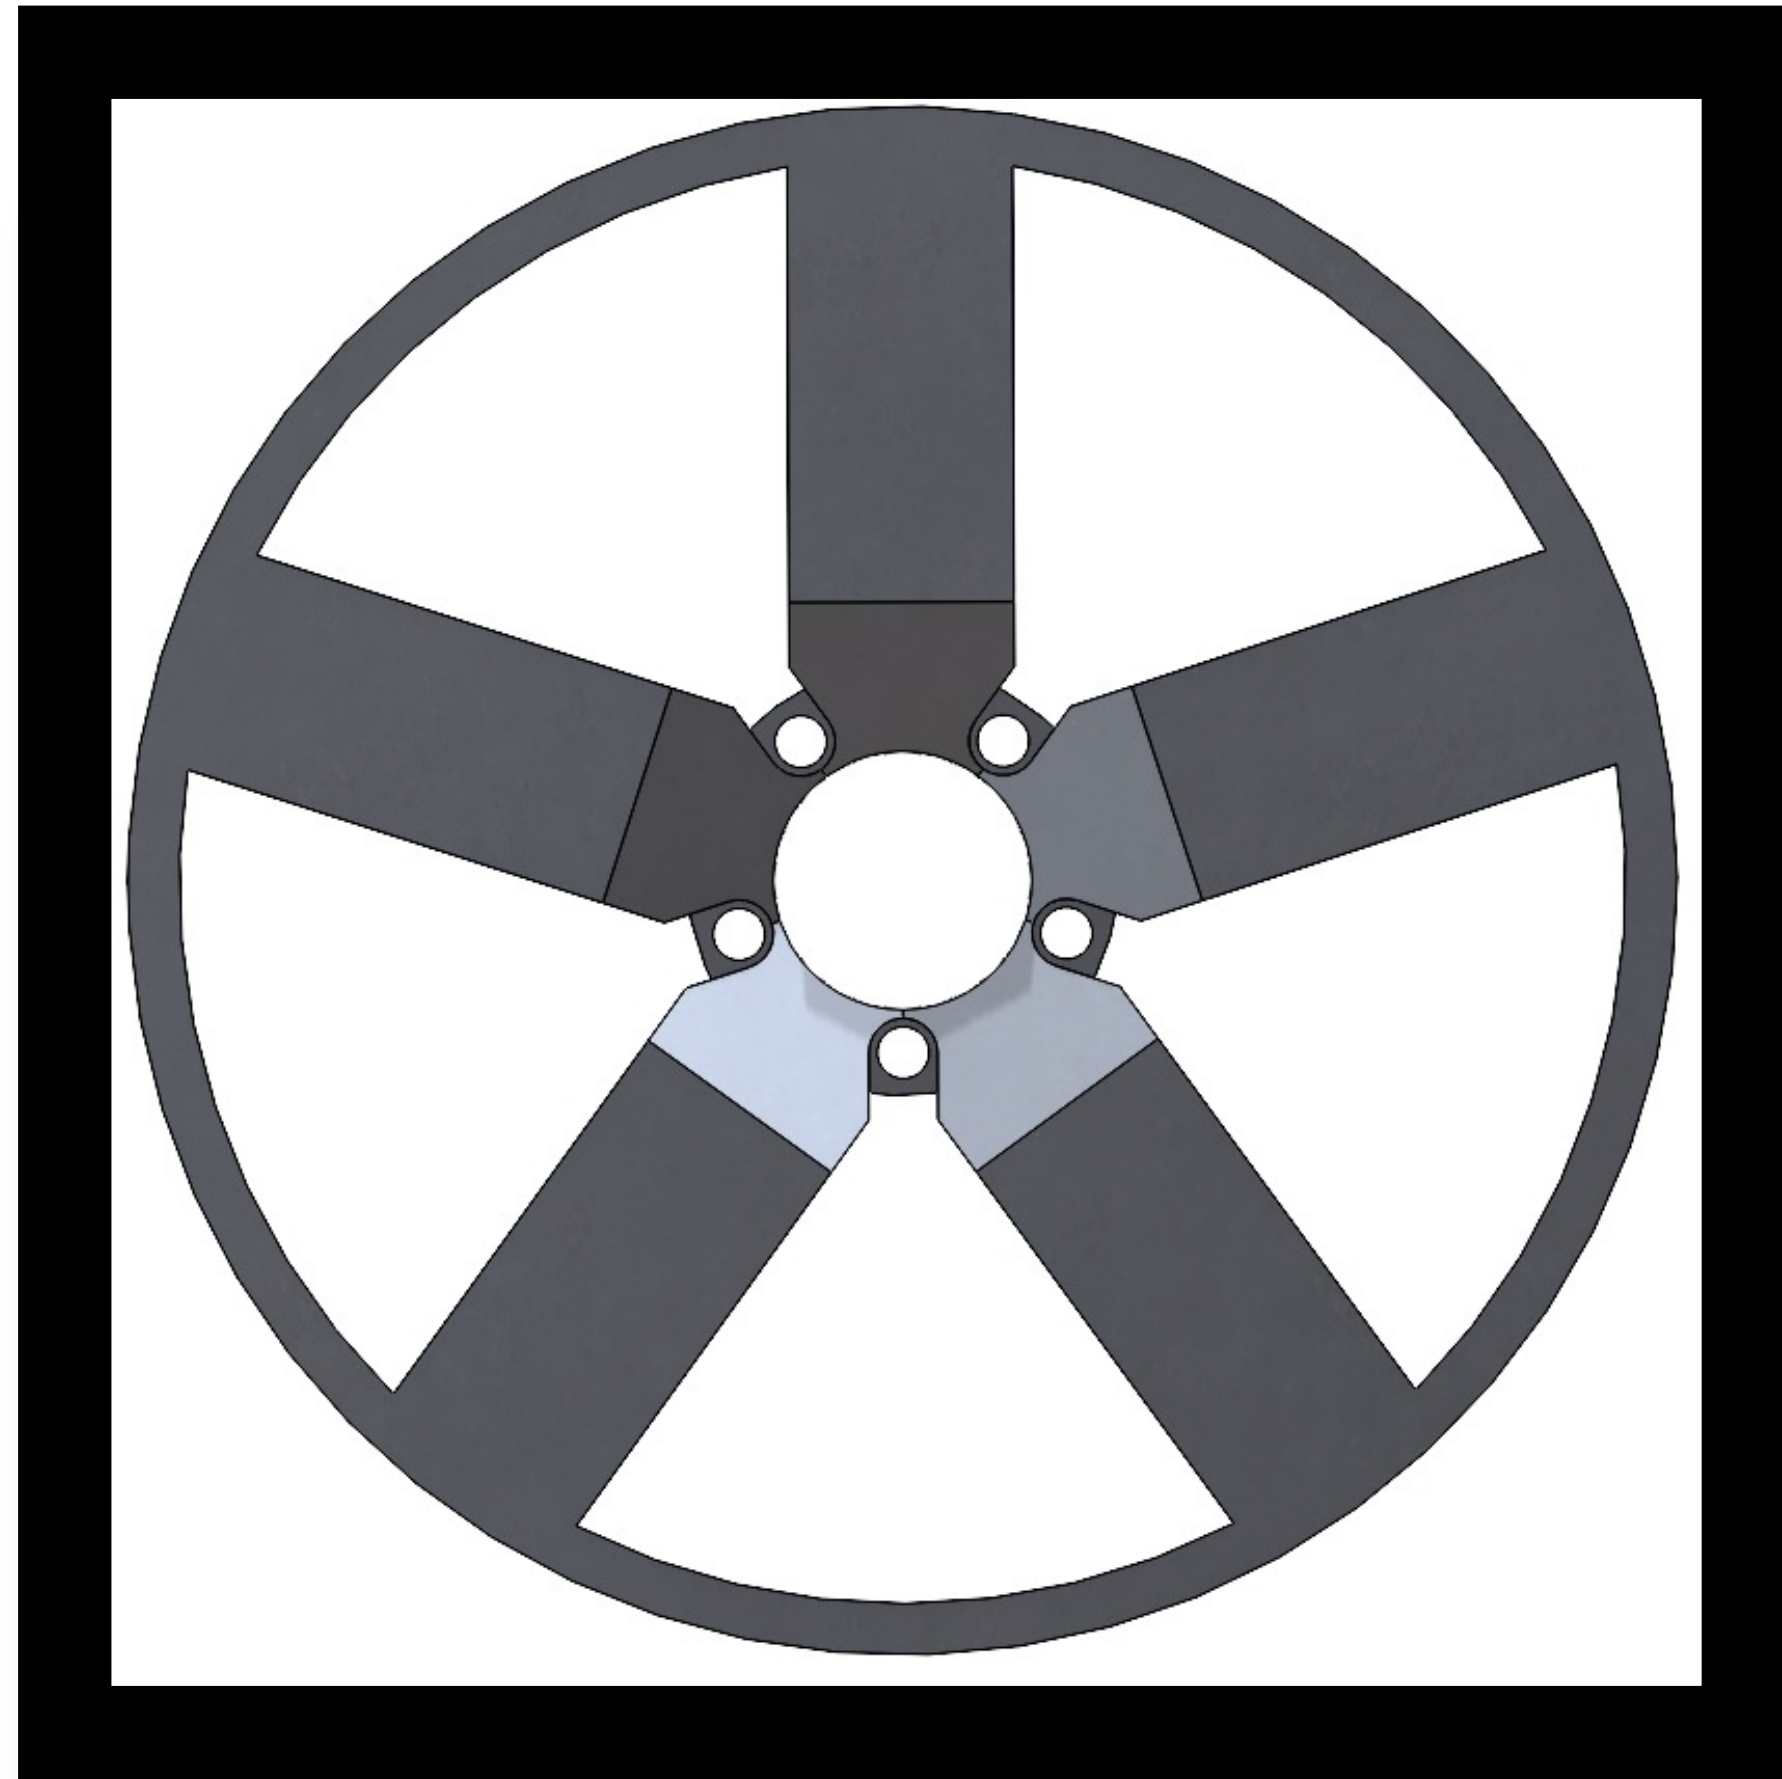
Isometric view of CAD model. The five “bars” resemble the basic geometry of the Dark Horse wheel
